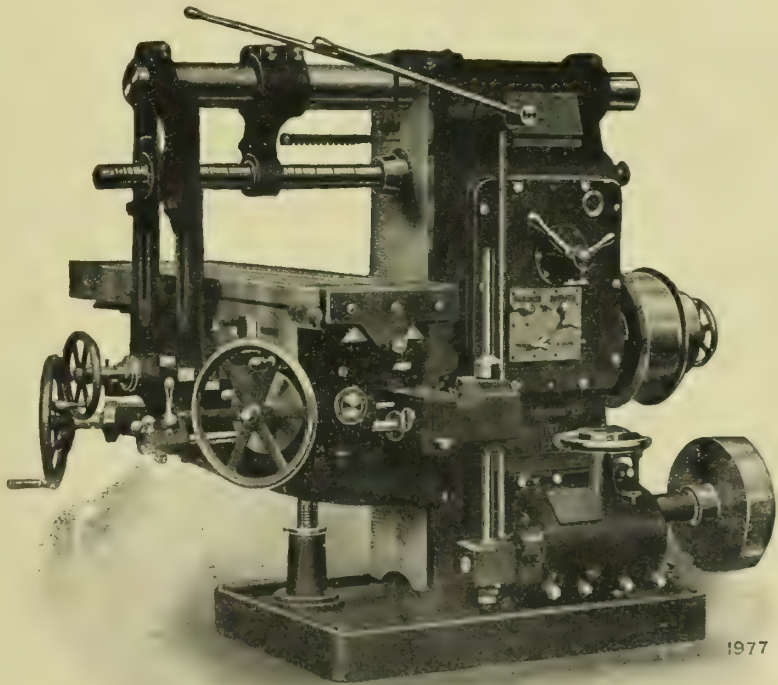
No. 22 SINGLE-PULLEY MILLING MACHINE. MESSRS. ALFRED HERBERT, LTD., COVENTRY.
